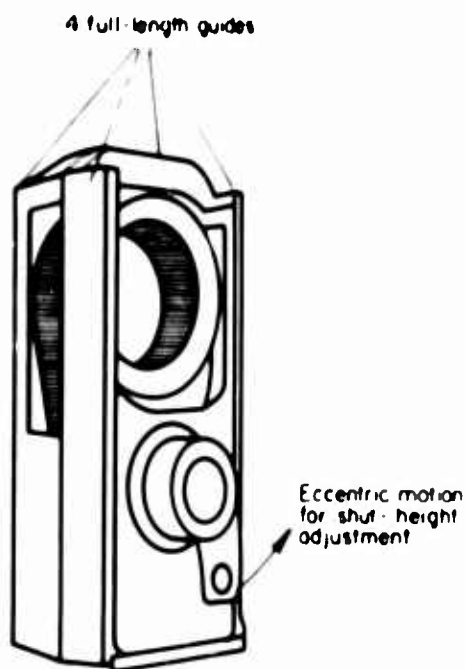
RAM-PITMAN ASSEMBLY AND SHUT-HEIGHT ADJUSTMENT IN A MECHANICAL PRESS WITH FRONT-TO-BACK ECCENTRIC SHAFT(4)
